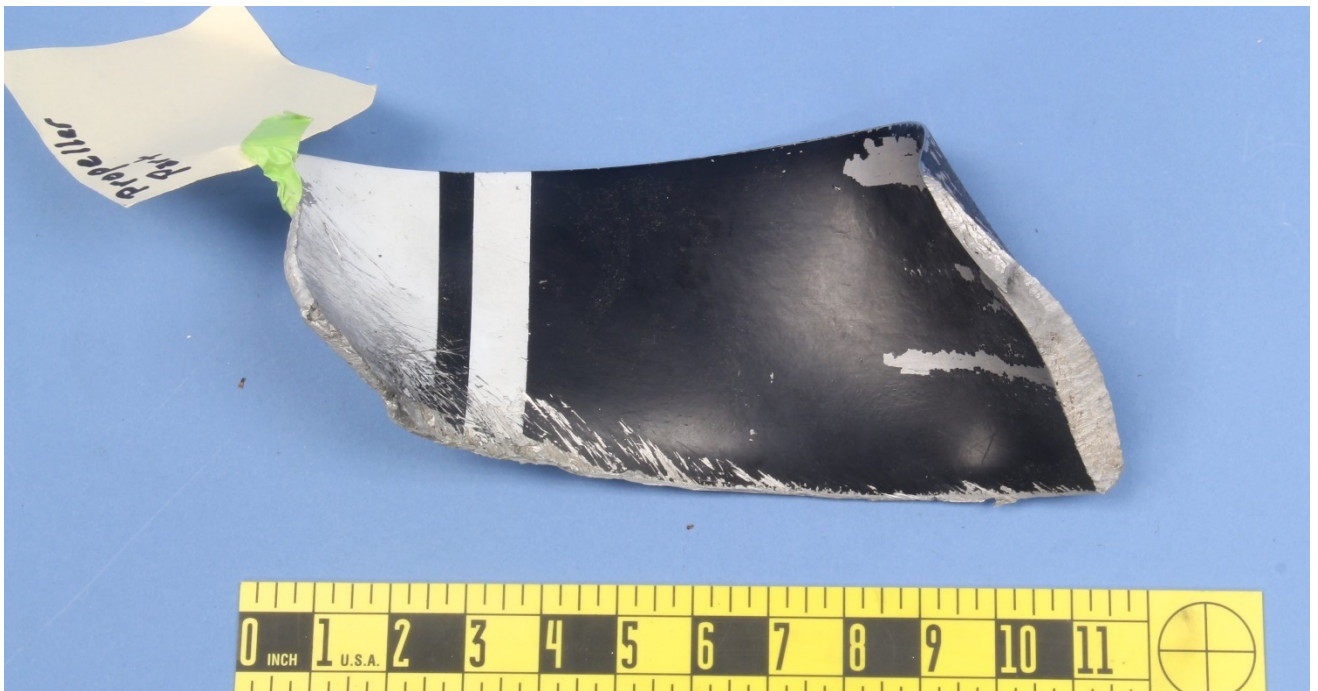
View of the fractured blade side remnant found away from the debris field.
